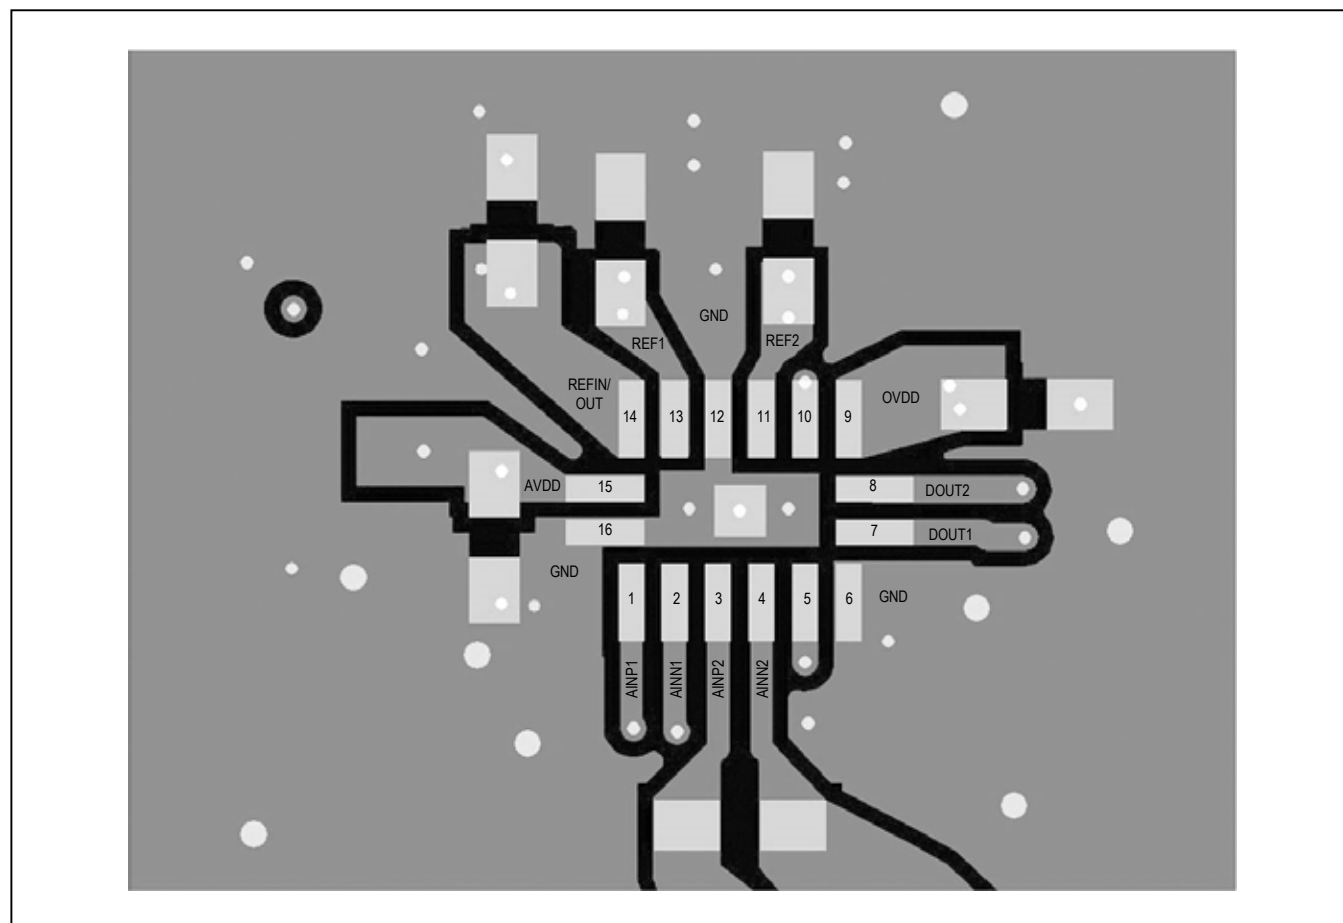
PCB Layout Example for MAX11192/MAX11195/MAX11198
